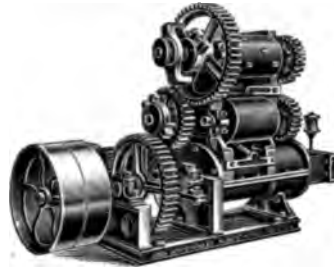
Screw Machine with Rollers, Distributers, and Cylinders with Points (Whitehead).
